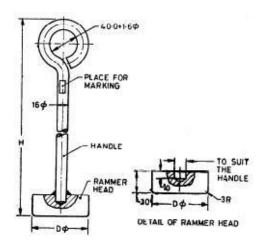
Dimensions and Weights for Round Hand Rammer (All dimensions in millimetres)
